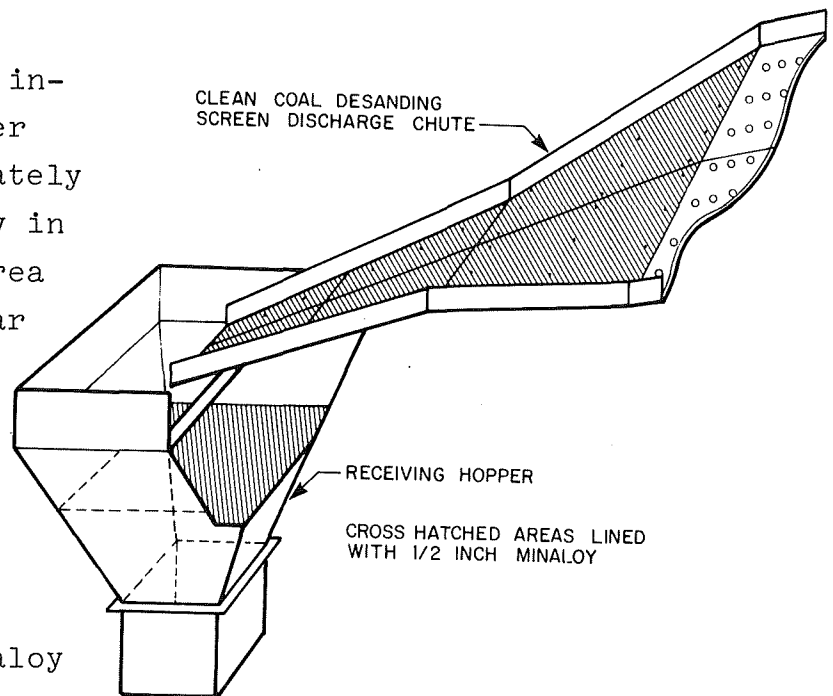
DISCHARGE SECTION OF CLEAN-COAL DESANDING SHAKER.
